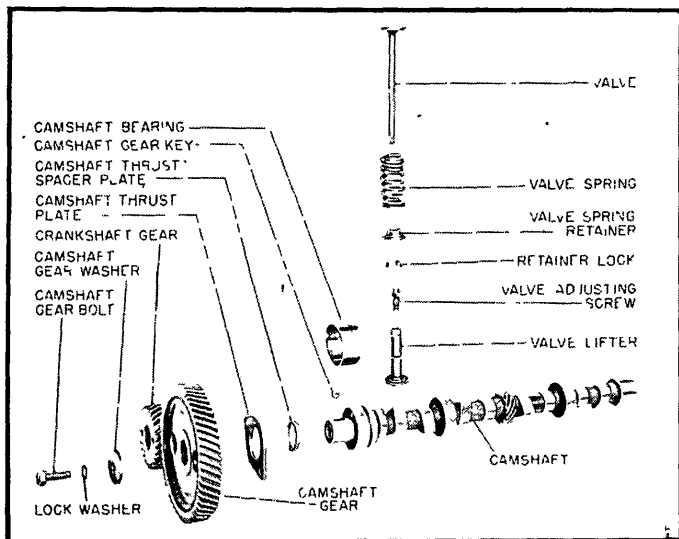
Lay out f valve system. 1946-50 four cylinder L-head engine. This is typical of the F-head engine except that the intake valve mechanism is contained in the cylinder head
